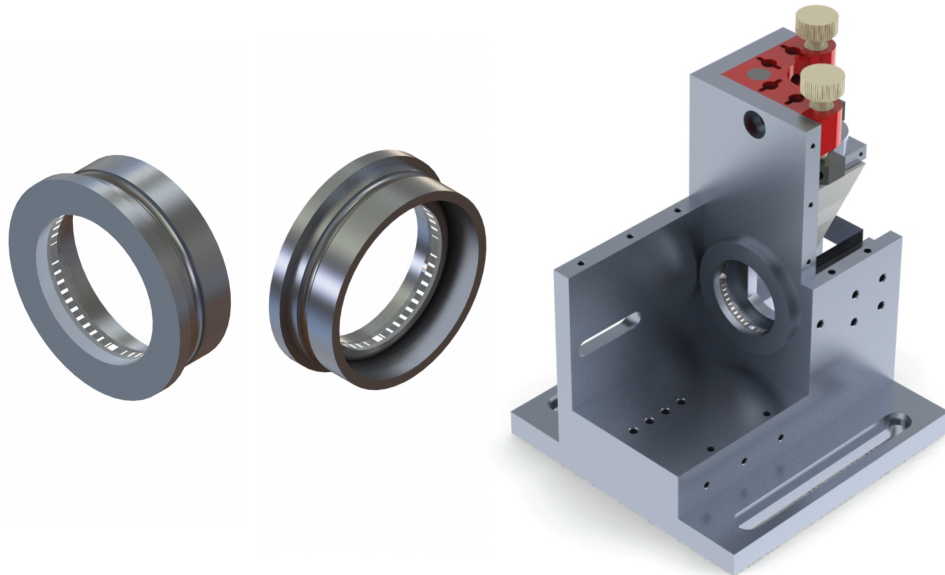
Custom holder for quarter-wave plate. left: Design of the holder for the quarter-wave plate. The holder allows for a seamless manual rotation of the plate to its final position. right: Mounting of the holder inside of the tower. The aperture for the plate is designed to be as close as possible to the PBS. The holder can be secured in place by a screw on the side of the tower.
